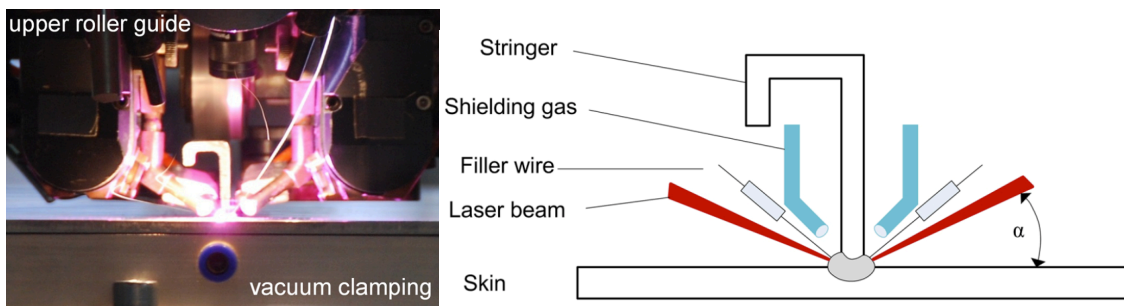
Schematic configuration of the dual laser welding skin-stringer process (45)
